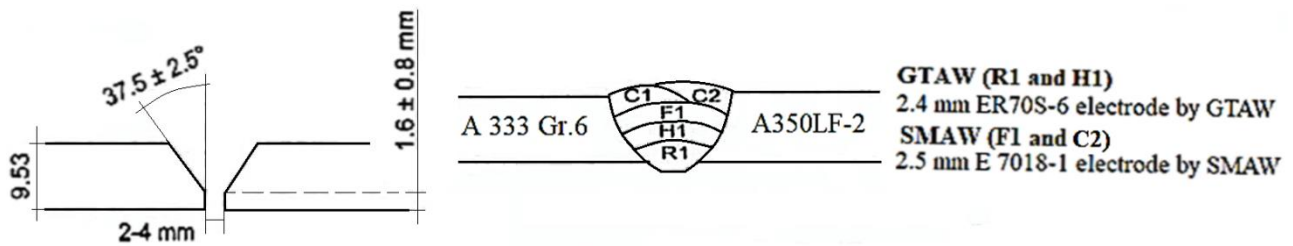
Weld groove, base metals, electrode types, welding methods and welding passes used in the W-B coded welding process.
